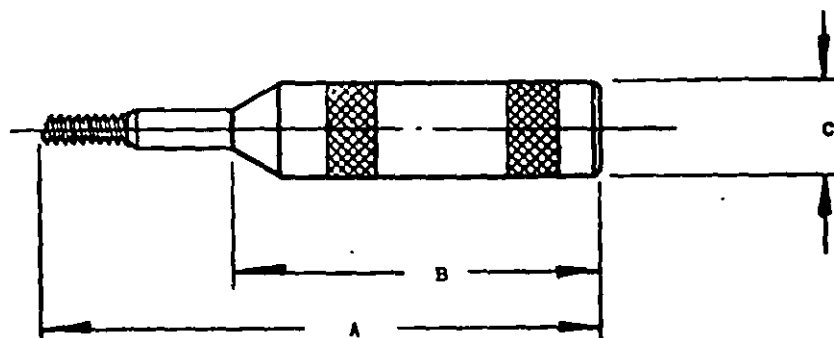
Type III, class 2, style A mandrel inserting tool for #2(.086) and #3(.099) Unified Coarse thread series.
